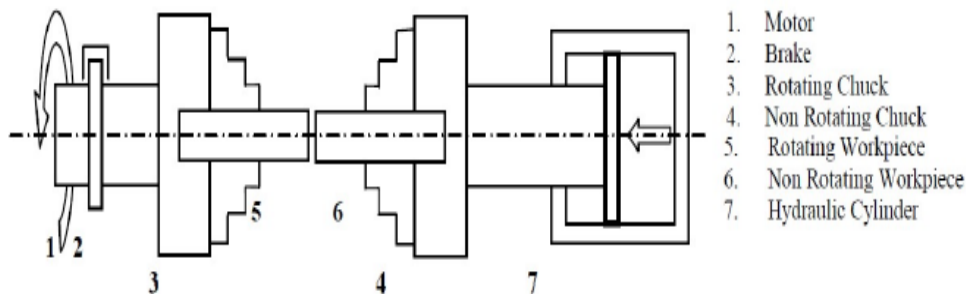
Layout of Continuous Drive Friction Welding [4]
